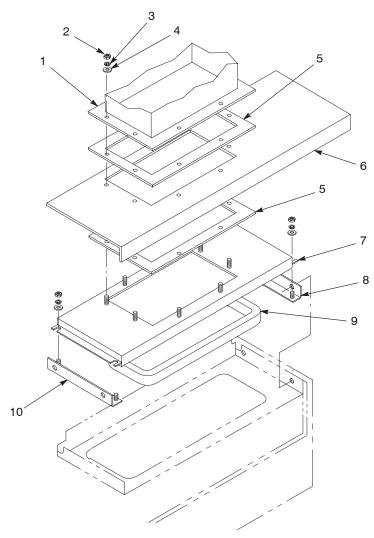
Series 3400, 3500, and 3700 hood assembly
